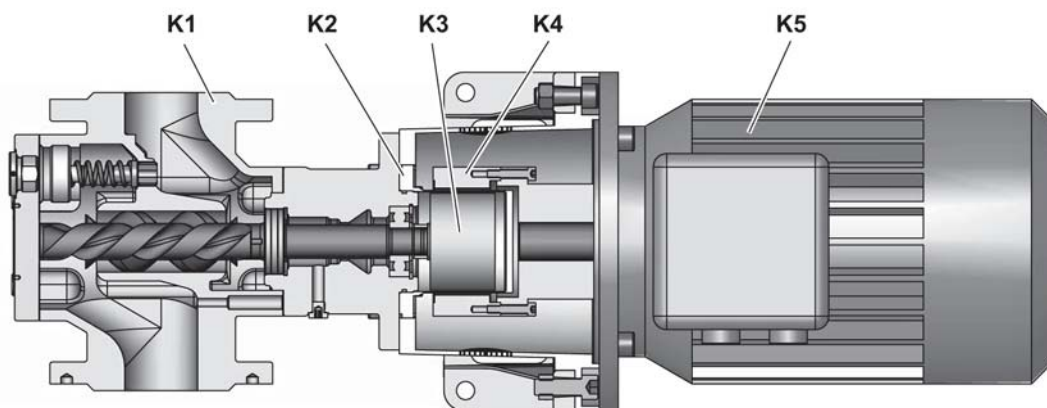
Structure of 3S-pump with magnetic coupling and motor
